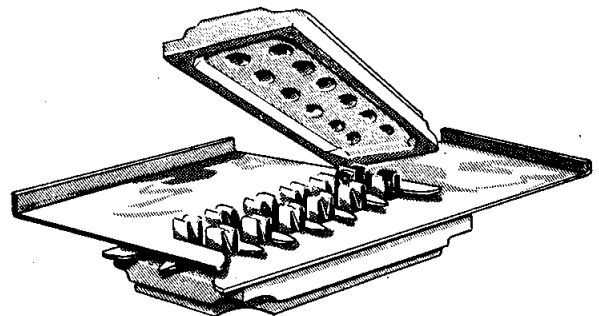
Illustration showing the use of the TDQ contact alignment tools.
